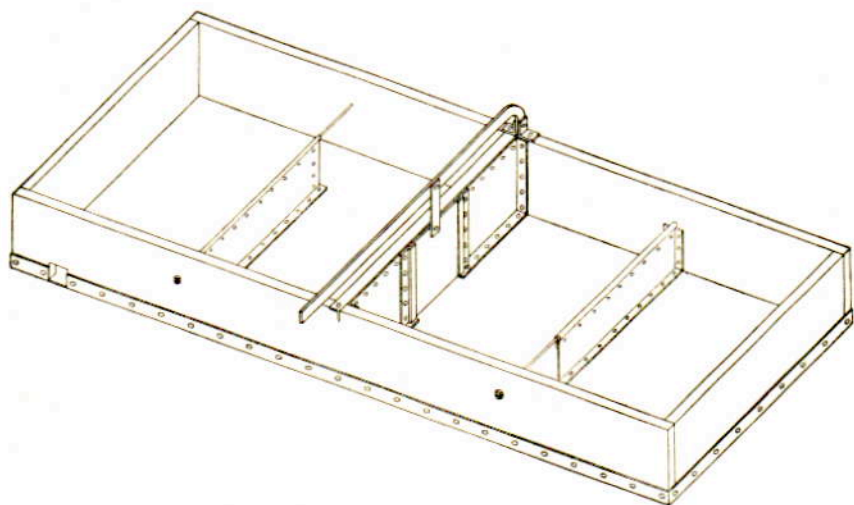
Finishing-off pan. This model is 7 feet 6 inches long, 2 feet 8 inches wide, and 10 inches deep. It should be provided with a tight-fitting gate that is easy to open and close. The furnace is smaller but similar in design to that shown in figure 11. The two baffles help to keep the bottom of the pan from sagging and facilitate skimming. It is best to use heavy copper for the bottom of the pan. A sheet of 4-pound cold-rolled copper is not too heavy.
